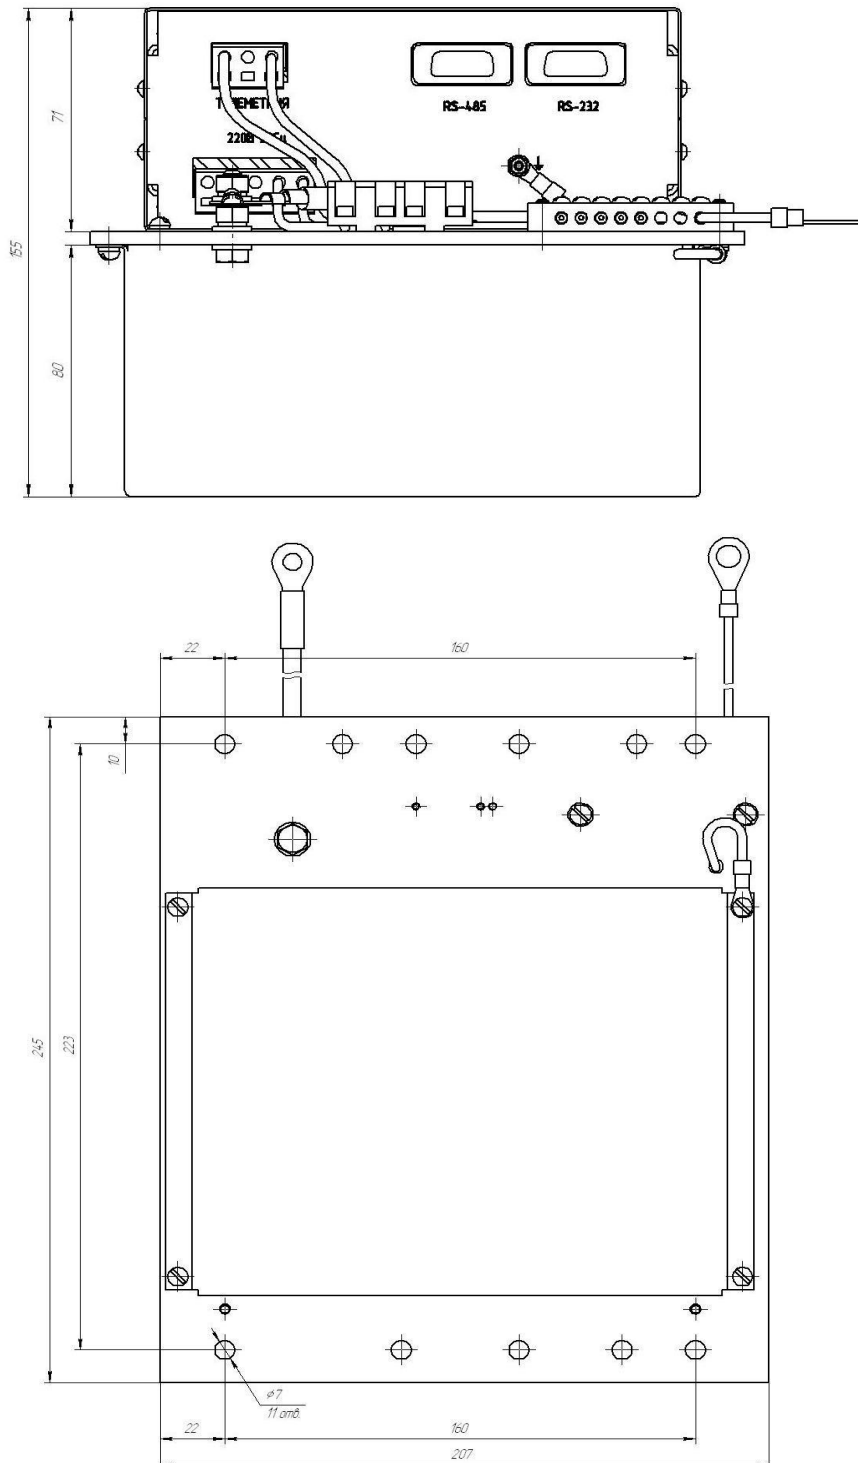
Overall and installation dimensions of the TMS-E5-01 Surface Acquisition Unit.
